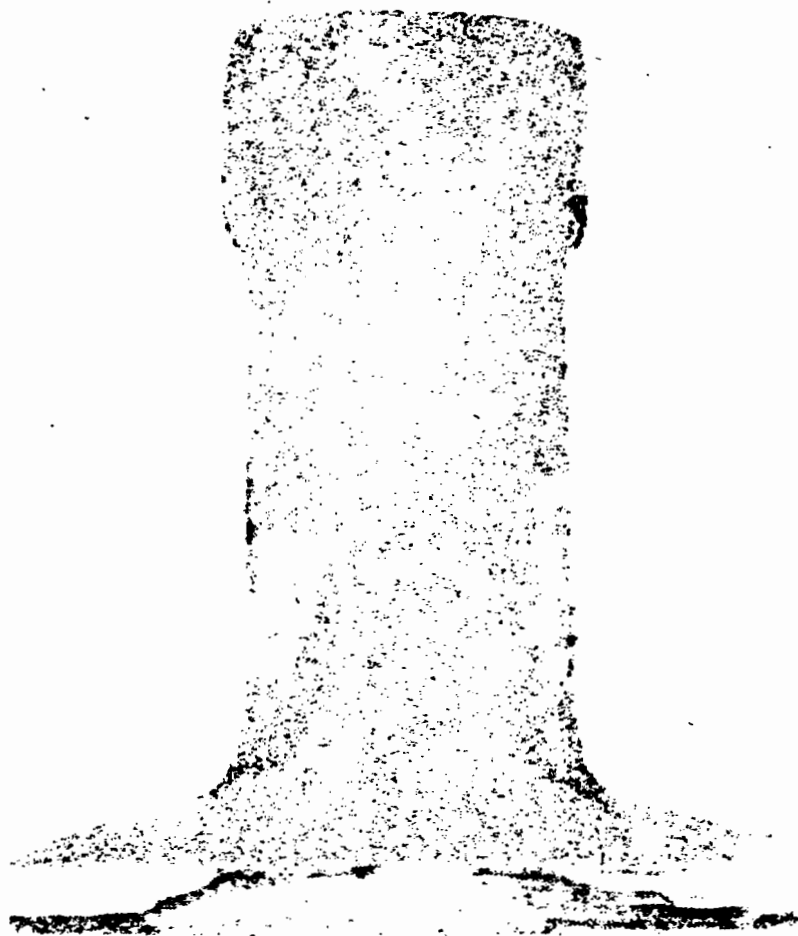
SULFUR PRINT OF THERMIT WELD.
